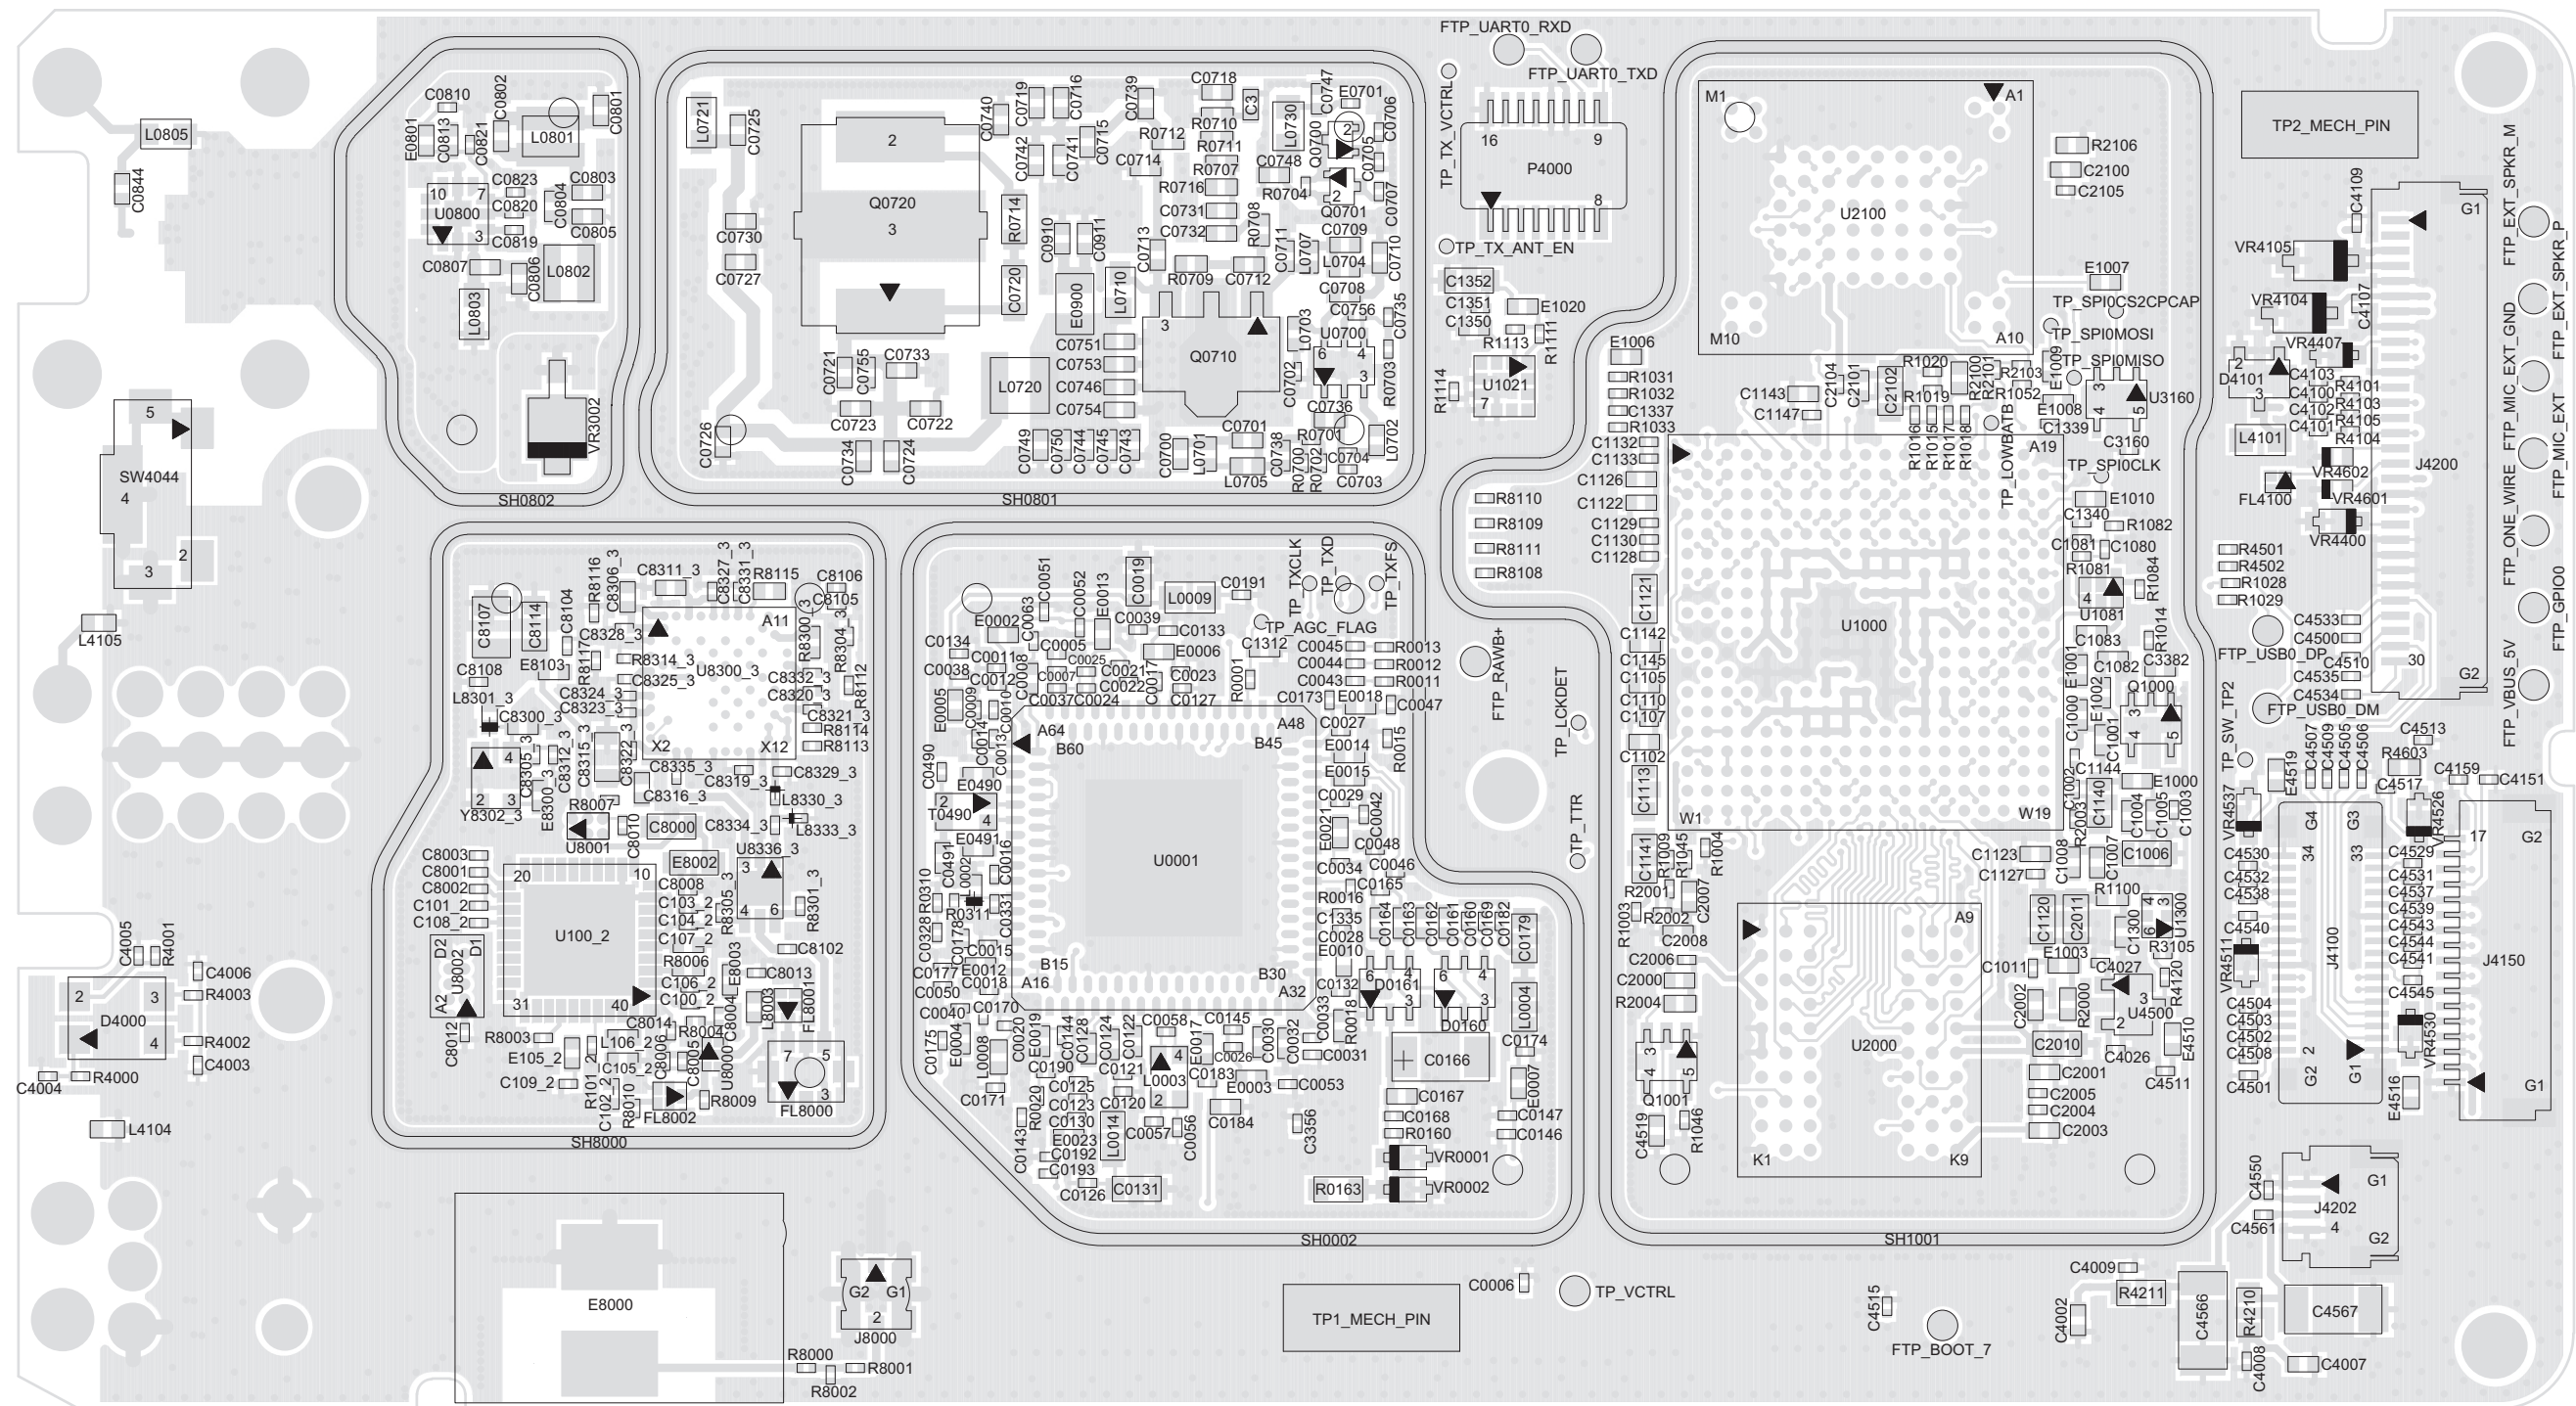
Main Board 800/900 MHz Top Side PCB No. PC000970A01\_AA
